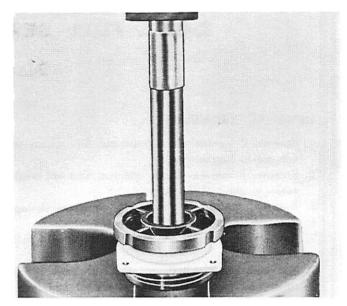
Removing Ball Bearing and Roller Bearing from End Cap
